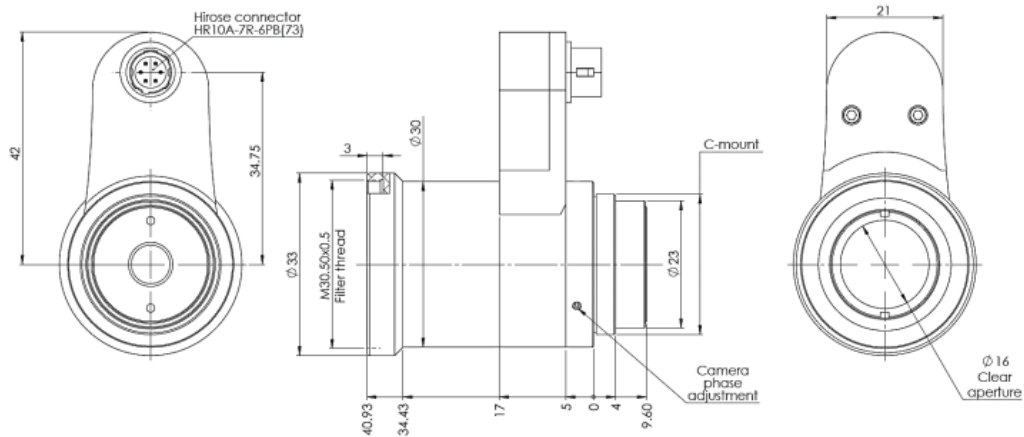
Mechanical drawing of the ELM-6-5.6-9-C electrical lens module
